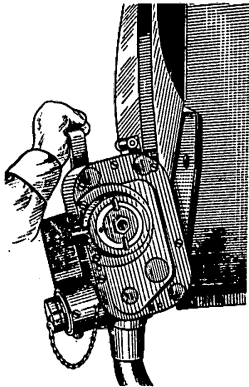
INSTALLATION OF БЛ-473M HOIST ON BOMB-BAY DOOR BUTT END
